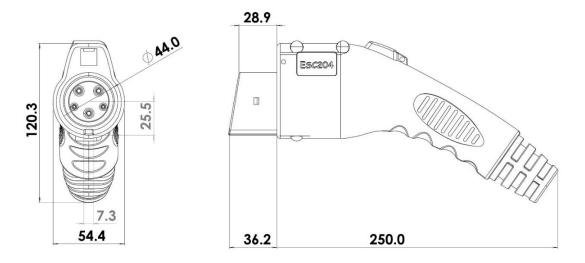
3D Printed Dummy Charger Plug with Alignment Tab (dimensions in mm, subject to 3D printing tolerances)
